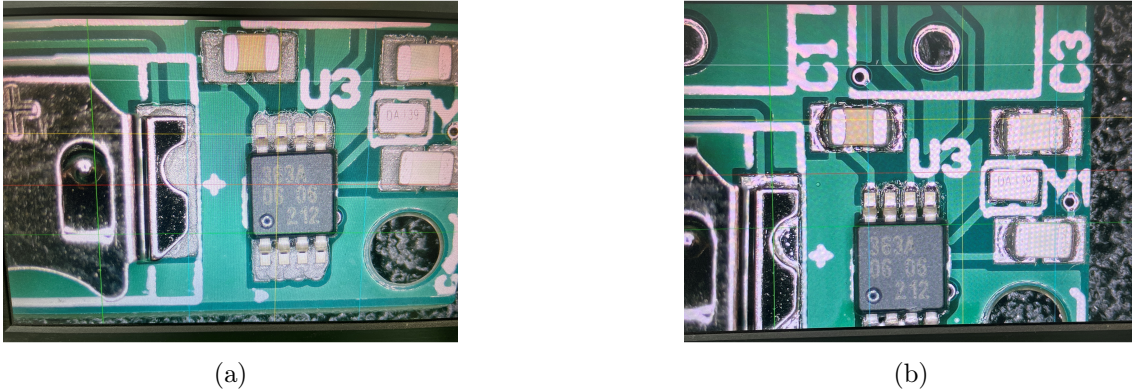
Re-flow process. a) Components placed on the PCB with solder-paste on pads, b) PCB after soldering in the re-flow oven.
